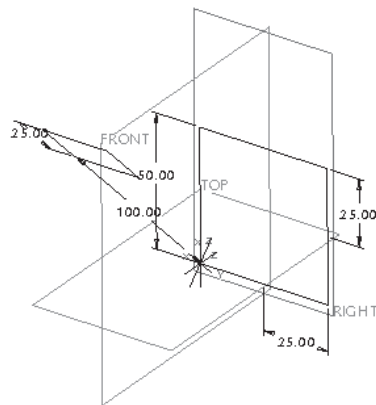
The two sections with dimensions and the default datum planes used to create the blend feature shown in the adjacent figure
